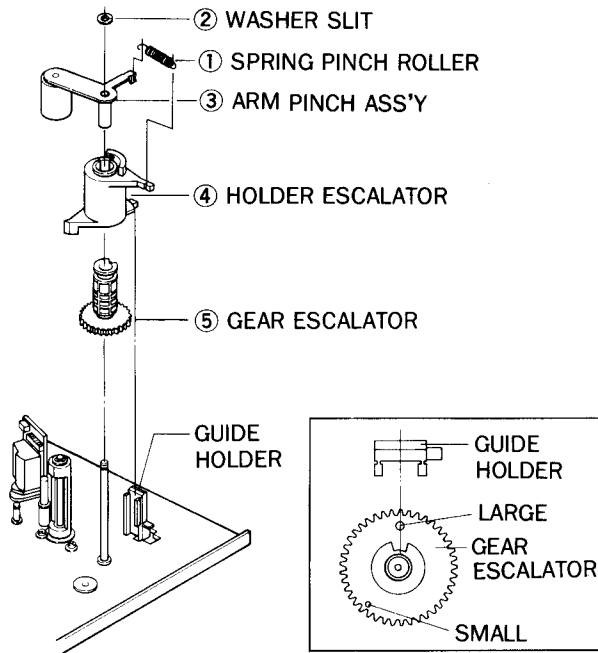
Pinch Roller Unit & Gear Escalator Removal
